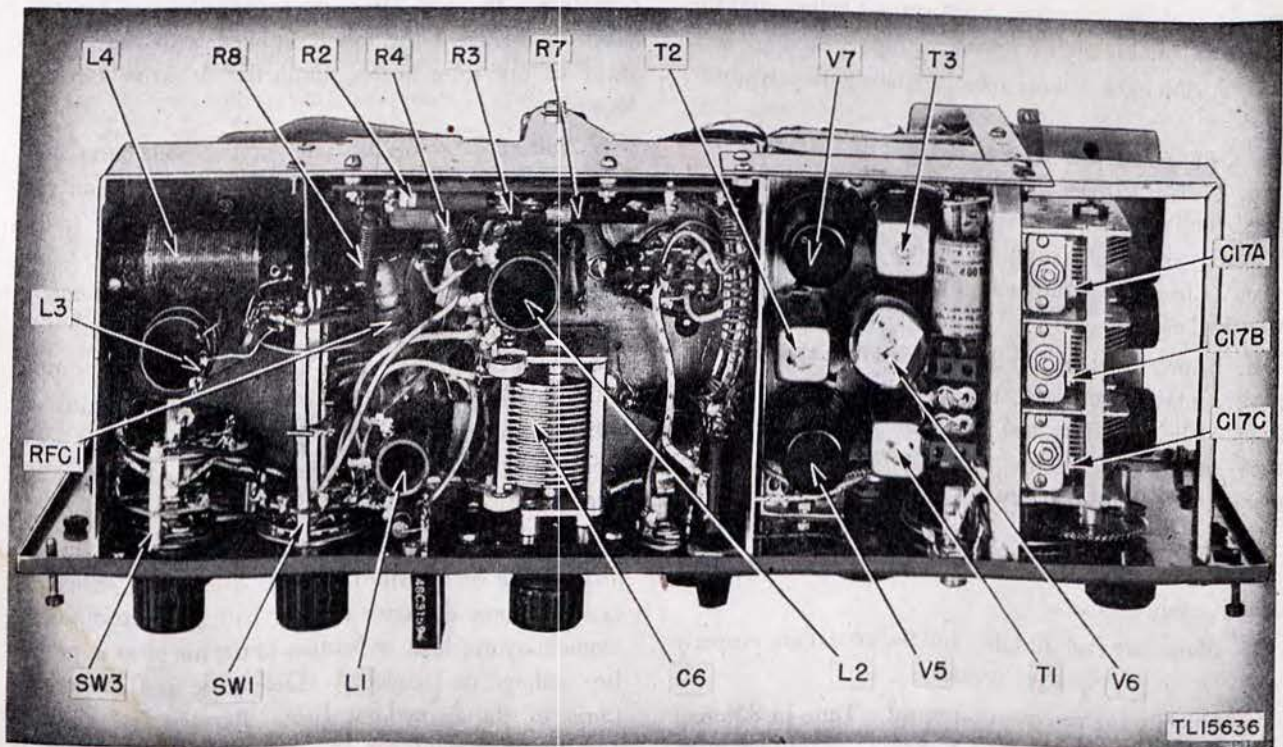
Bottom view of receiver-transmitter chassis, showing location of parts.
